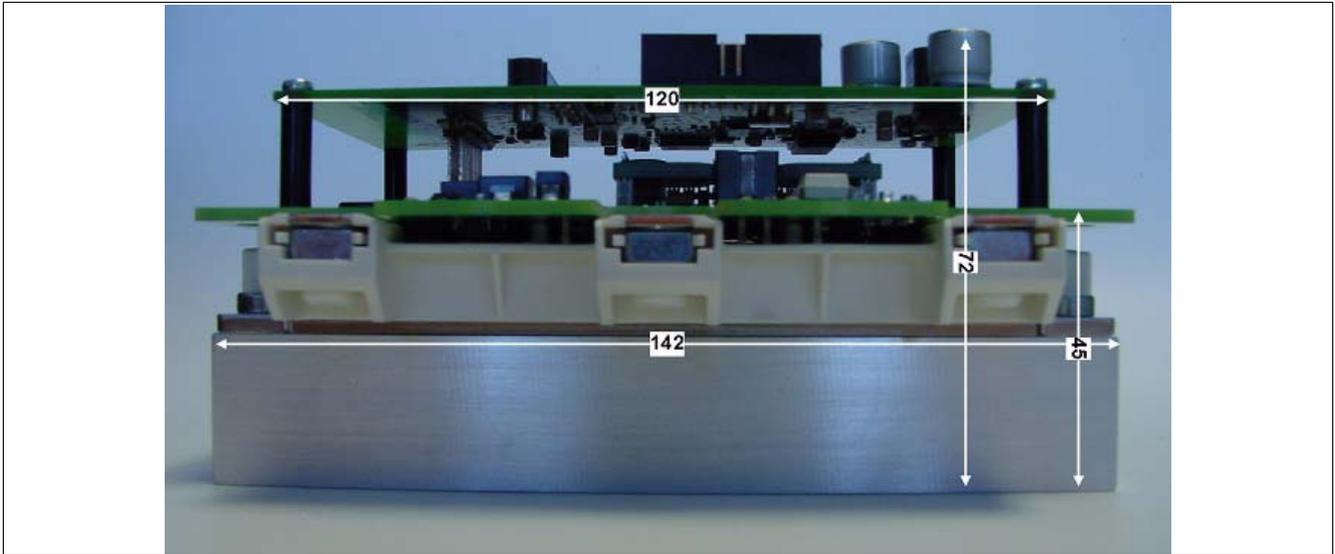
Dimensions of the Hybrid Kit for HybridPACK™1 - front view (all dimensions are in mm)
